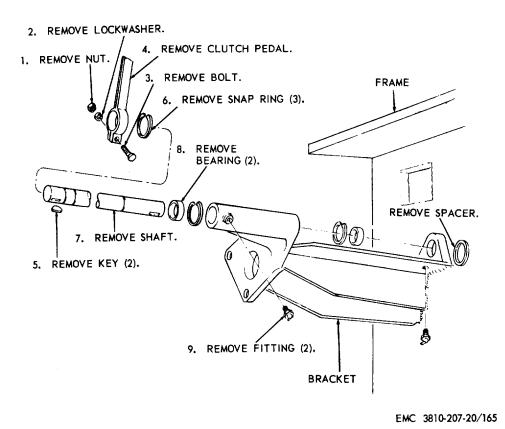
Clutch pedal and cross-shaft, removal and installation.
